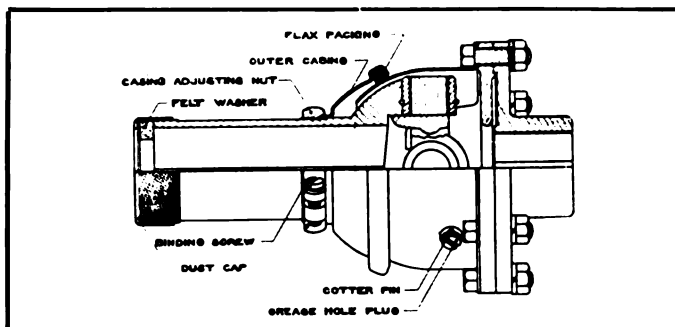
Sectional View of Spicer Universal Joint and Illustrating Components Requiring Attention.
